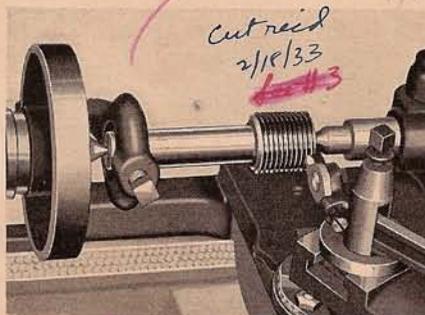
Cutting the Thread on a Large Diameter Special Tap.
